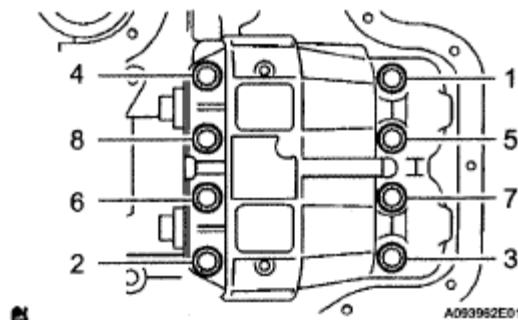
Identifying Balance Shaft Housing Bolts Sequence
